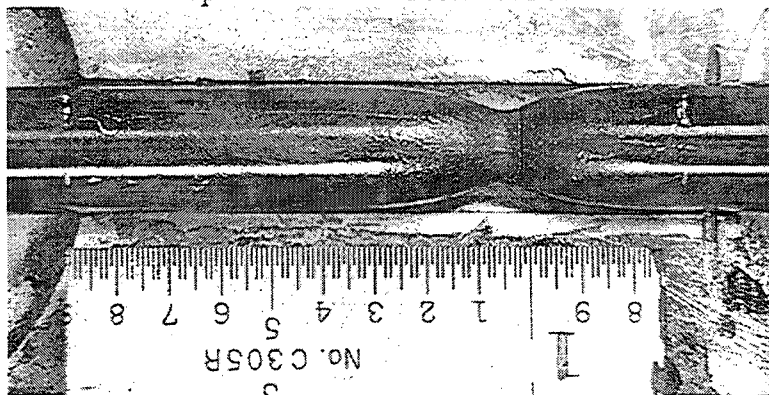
Fractured Tensile Specimens from Watts Bar Unit 1 Reactor Vessel Intermediate Shell Forging 05 (Axial Orientation)
